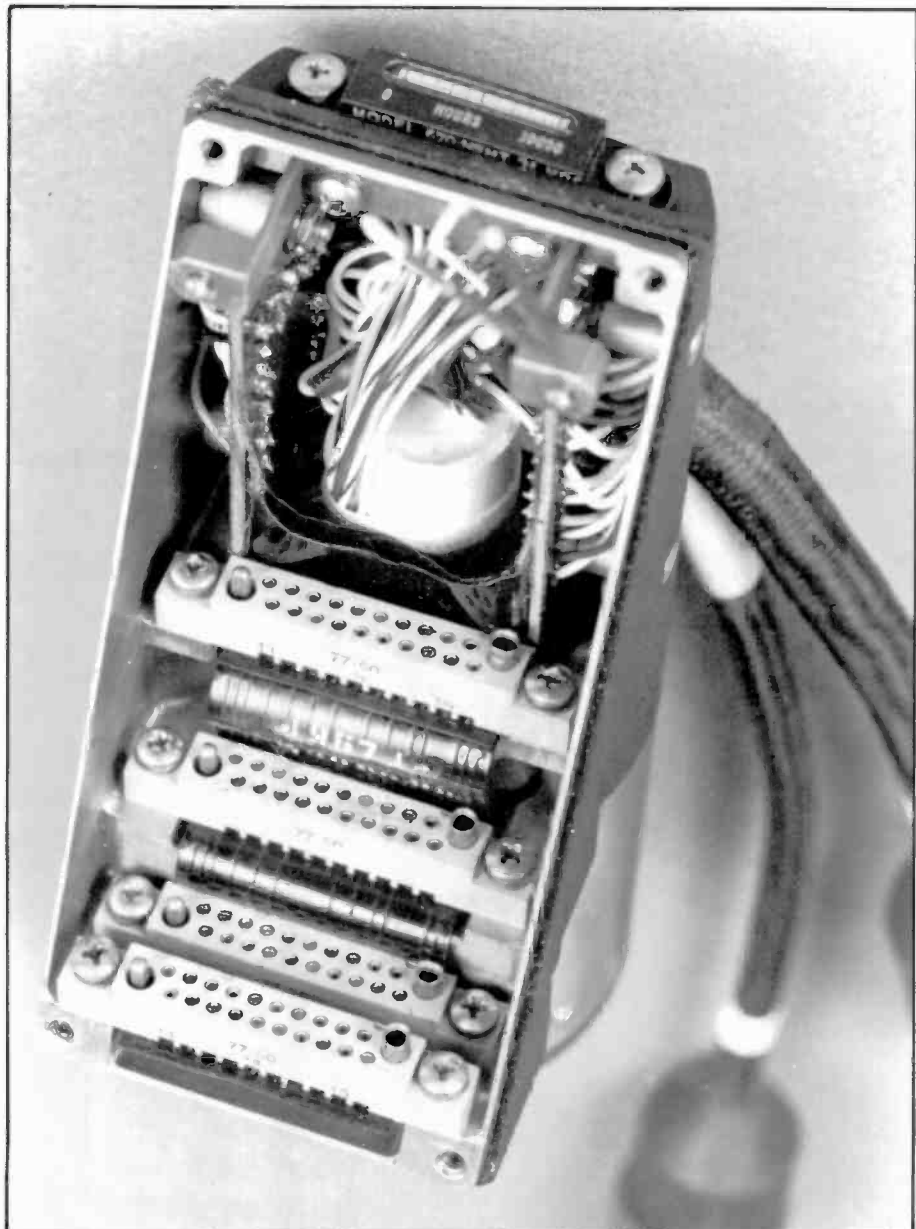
In this view, the plug-in boards are removed to reveal the flexible printed wiring that interconnects the board connectors and wires from the tube/yoke assembly.
